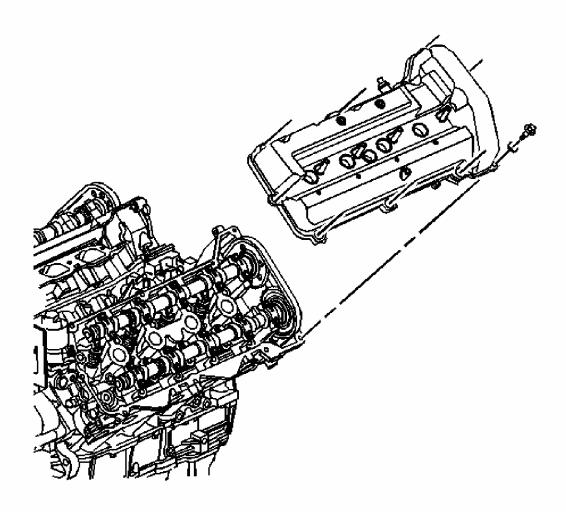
View Of Camshaft Cover & Bolts Courtesy of GENERAL MOTORS CORP.
